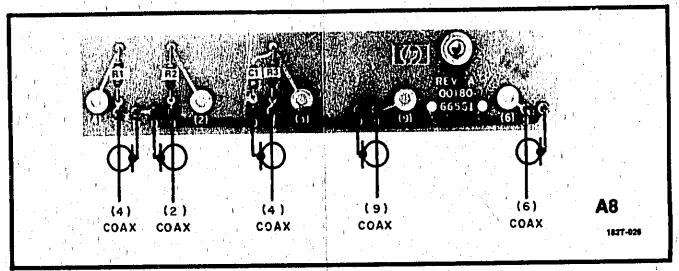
Auxiliary Output Board, A8 Component Identification
